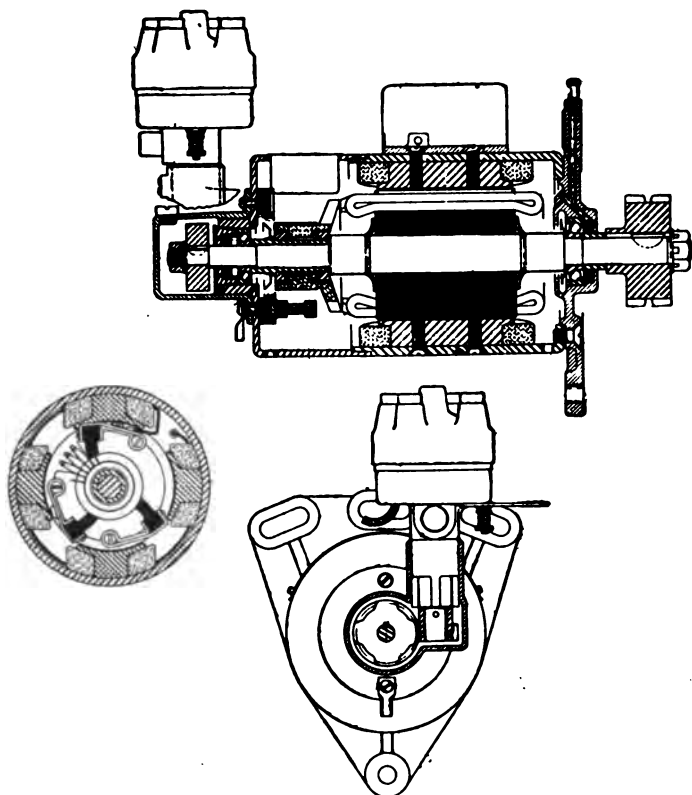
Sectional view of Dyneto type OA generator equipped with an ignition head and automatic cutout mounted on top
